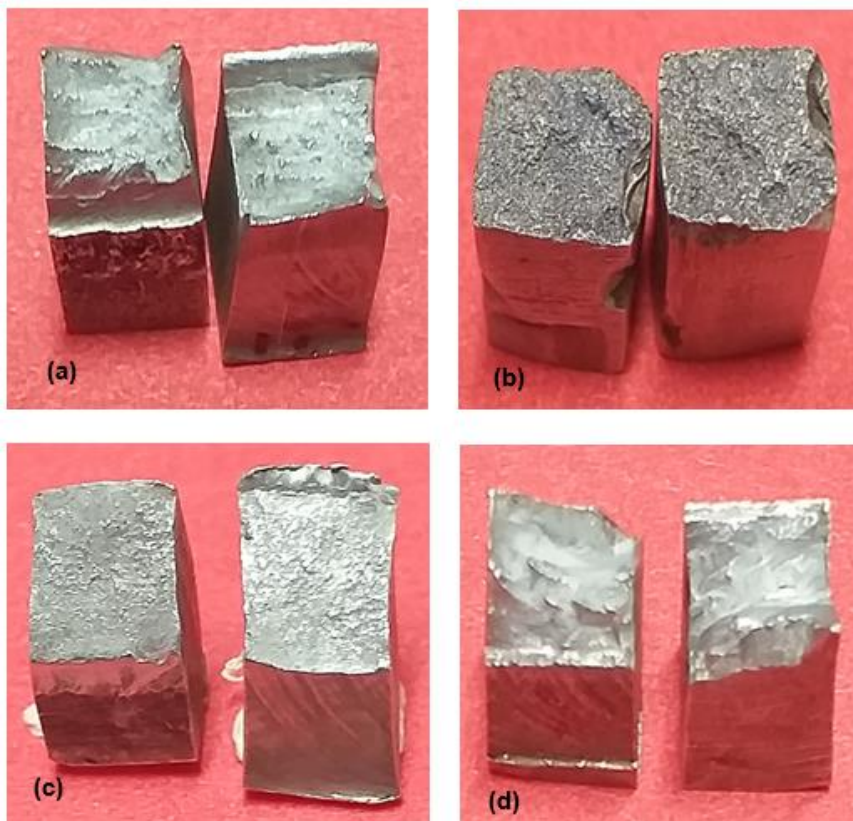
SEM Specimens; (a) Unprocessed FSW; (b) Unprocessed TIG; (c) Processed FSW; (d) Processed TIG.
